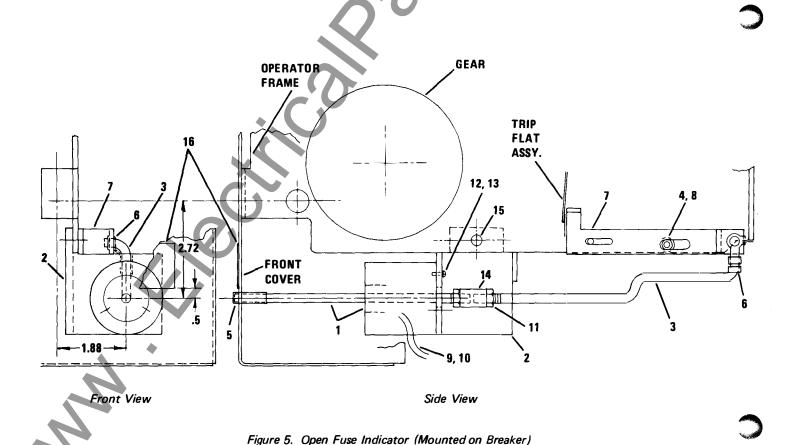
Open Fuse Indicator (Mounted on Breaker)
